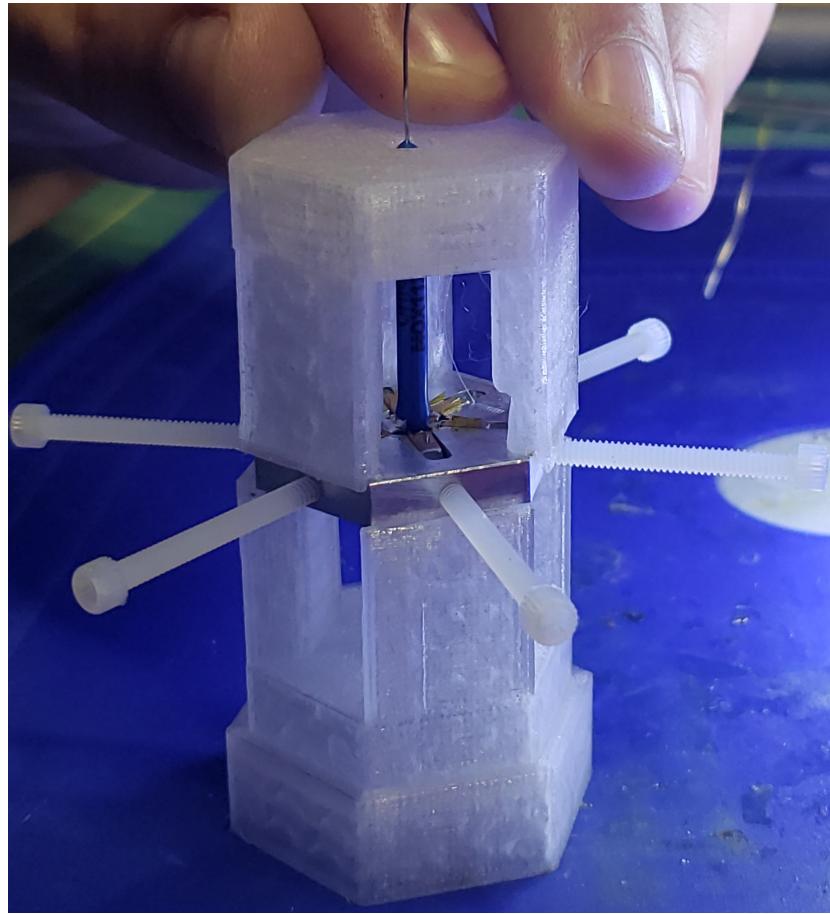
Checking the alignment of the second resistor with the resistor jig. The entire resistor jig assembly with two resistor jigs and a resistor jig stand is shown.
